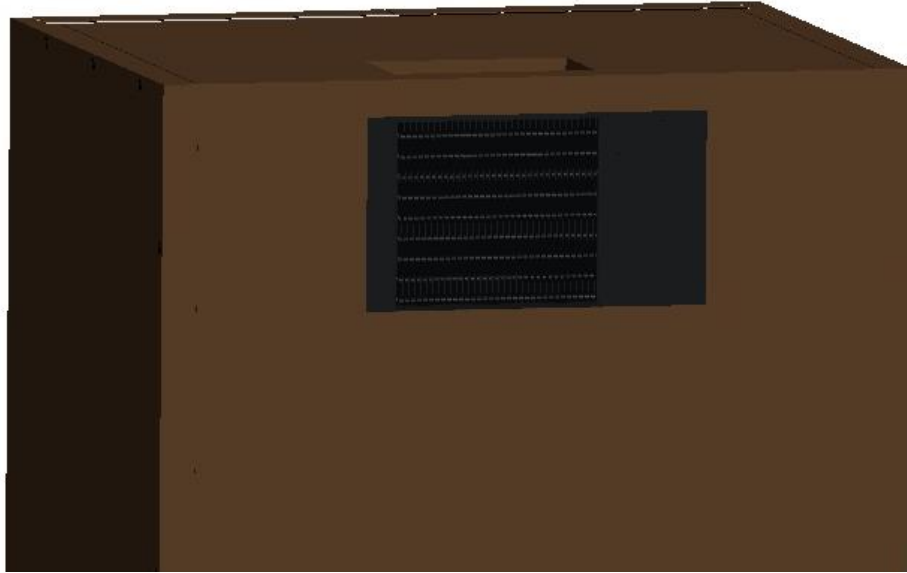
COOLING UNIT MOUNTED (TOP EXHAUST)
